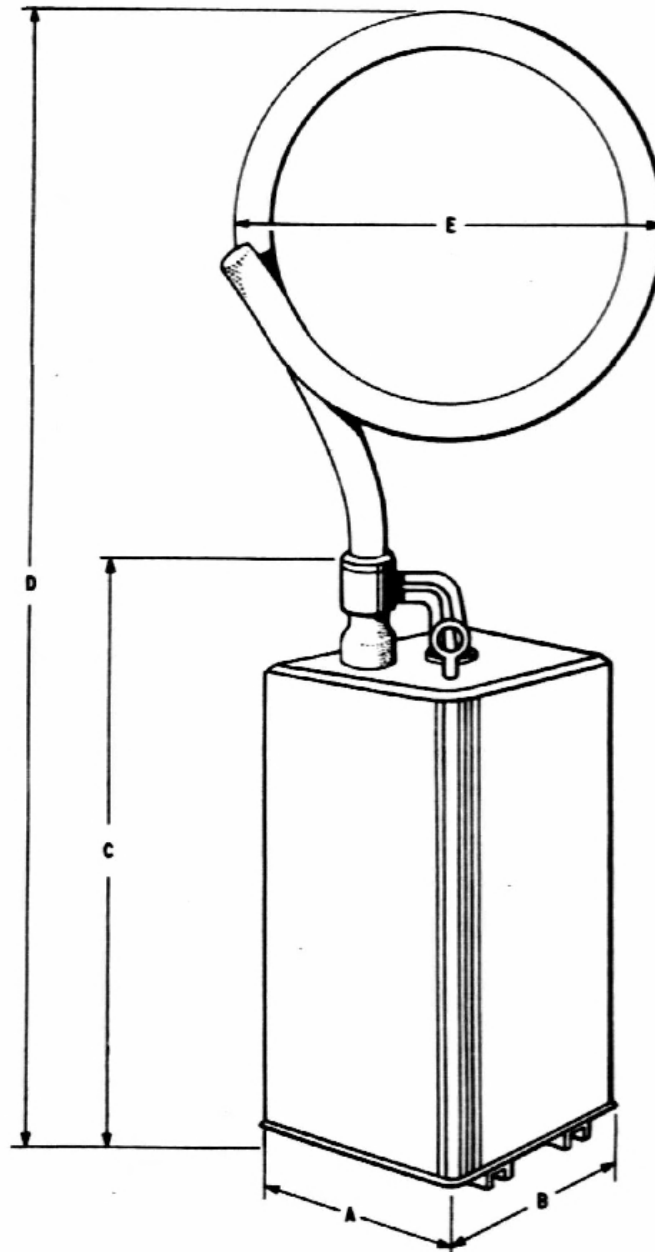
MANHOLE & POLEMOUNTED TYPE LOADING COIL CASE WITH SINGLE STUB CABLE.
